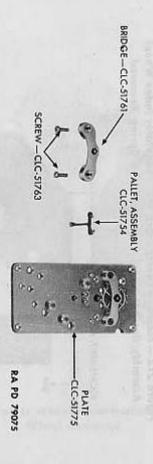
Message Center Clock M1 — Pallet Bridge and Pallet Assembly Removed
